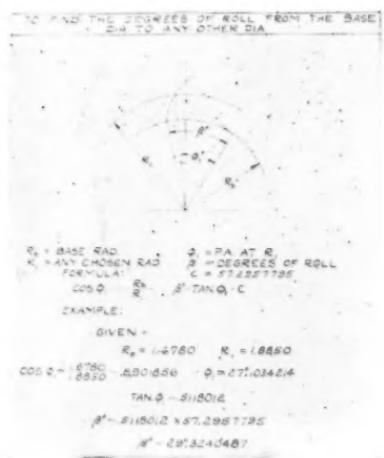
Method for finding the degree of roll from the base diameter to any other diameter.
